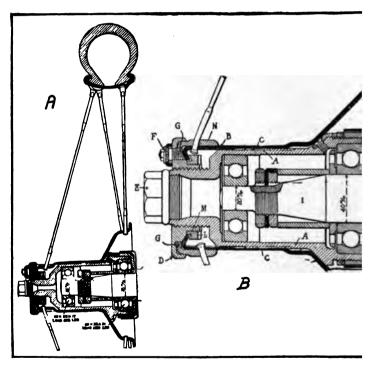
Sectional View, Showing Construction of Rudge-Wh Wire Wheel.
